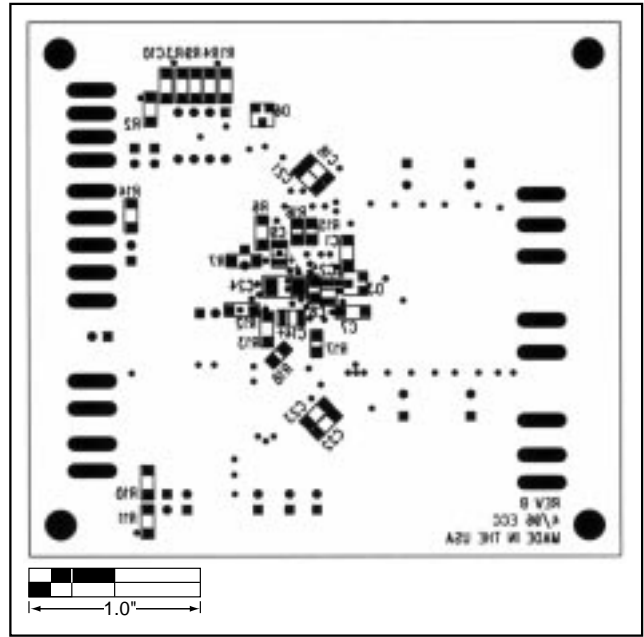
MAX1630/MAX1631/MAX1632 EV Kit Component Placement Guide—Solder Side
